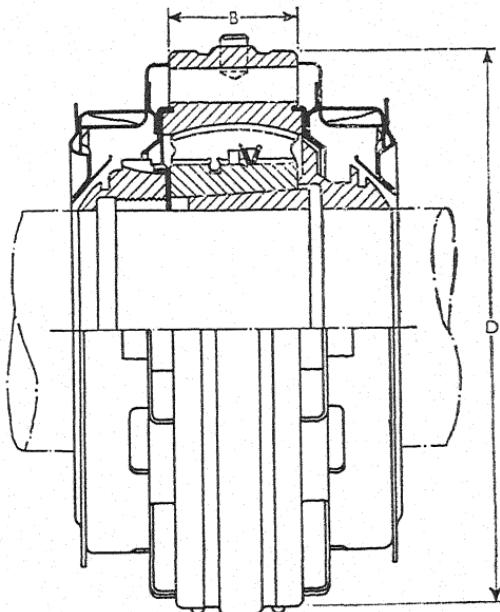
Nomy Pad Journal Bearing for Sleeve Mounting
